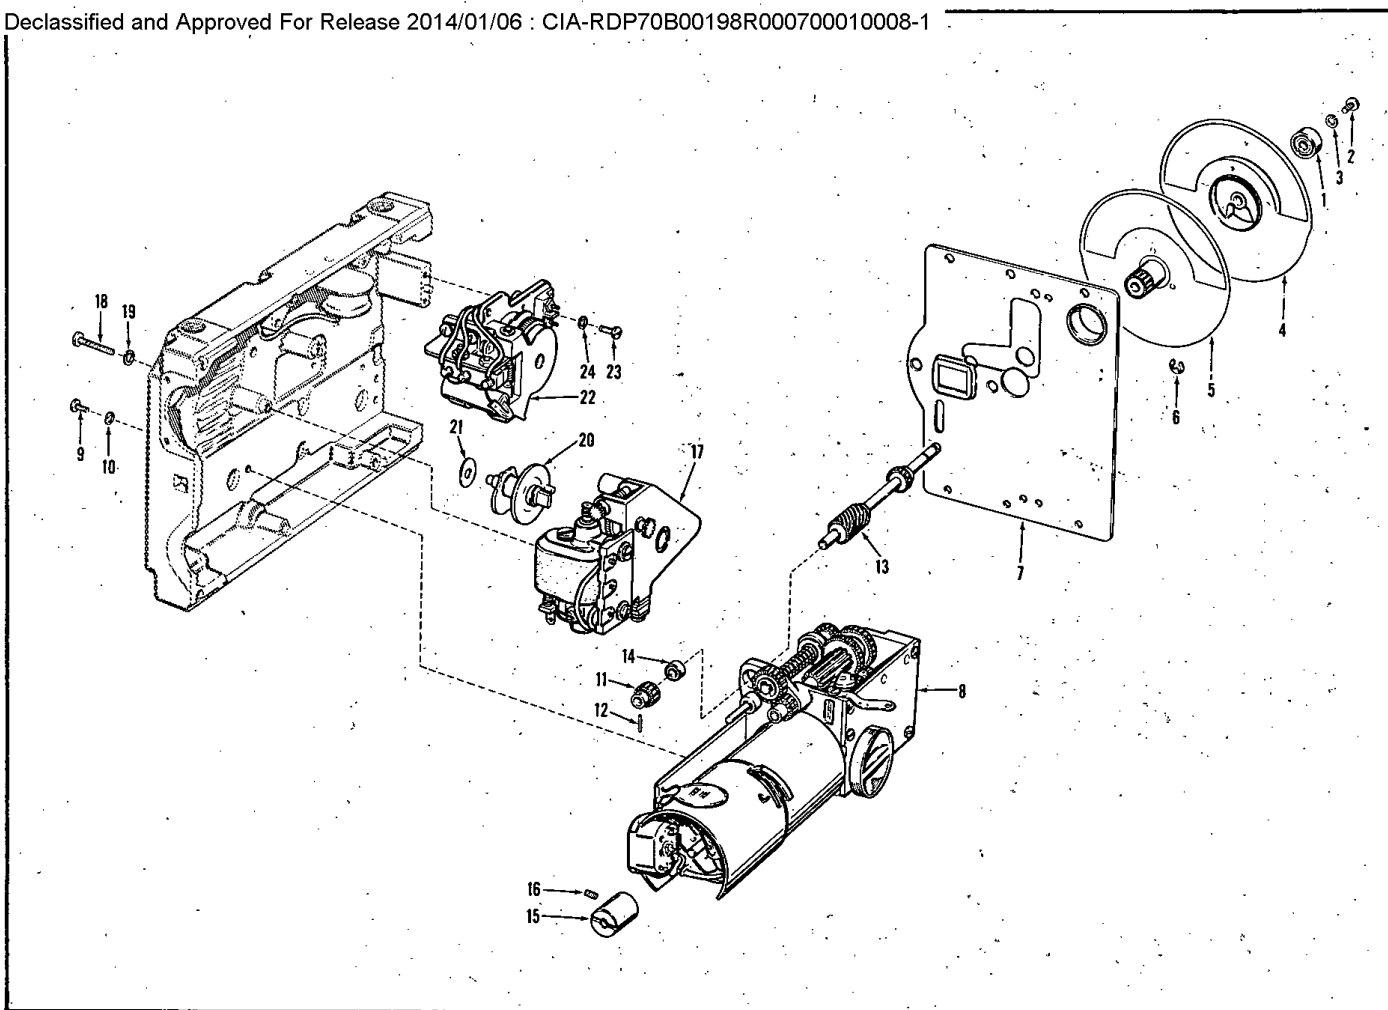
(Sheet 3 of 4) Exploded View of Motion Picture Camera
